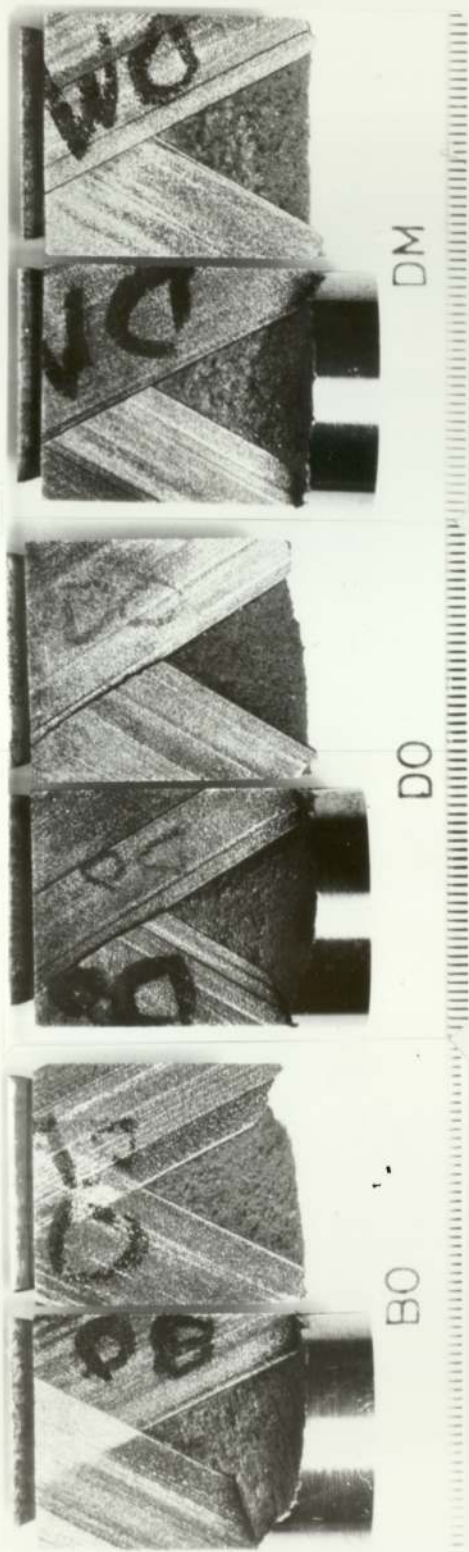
General appearance of short rod fracture toughness test specimens, halves with imperfect crack guidance by the slots (mag. x4.5)
